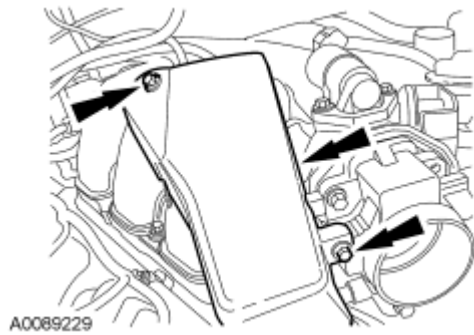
Locating Accelerator Cable Snow Shield Bolts
